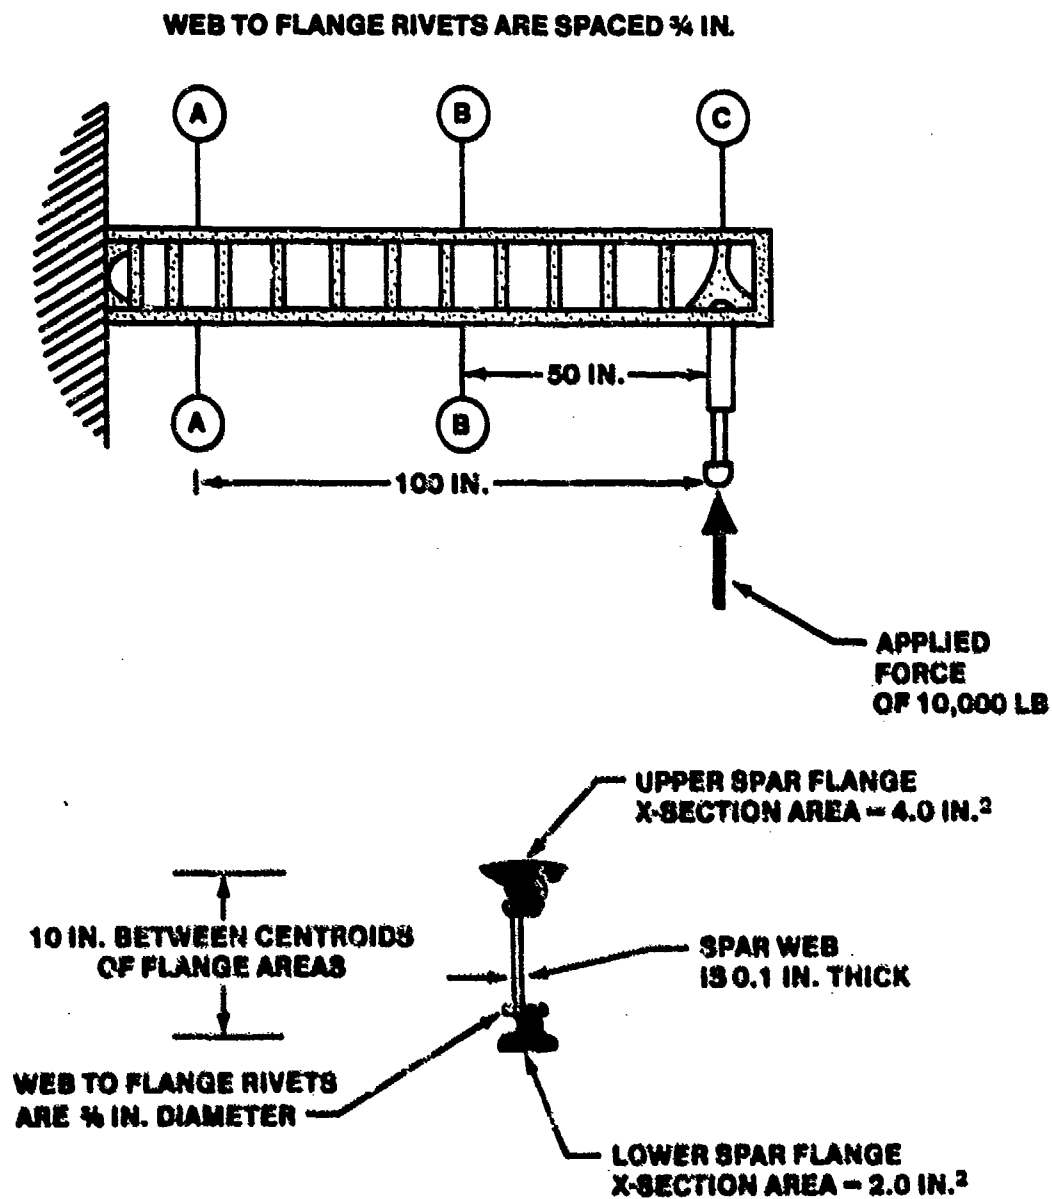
TYPICAL BEAM STRUCTURE
